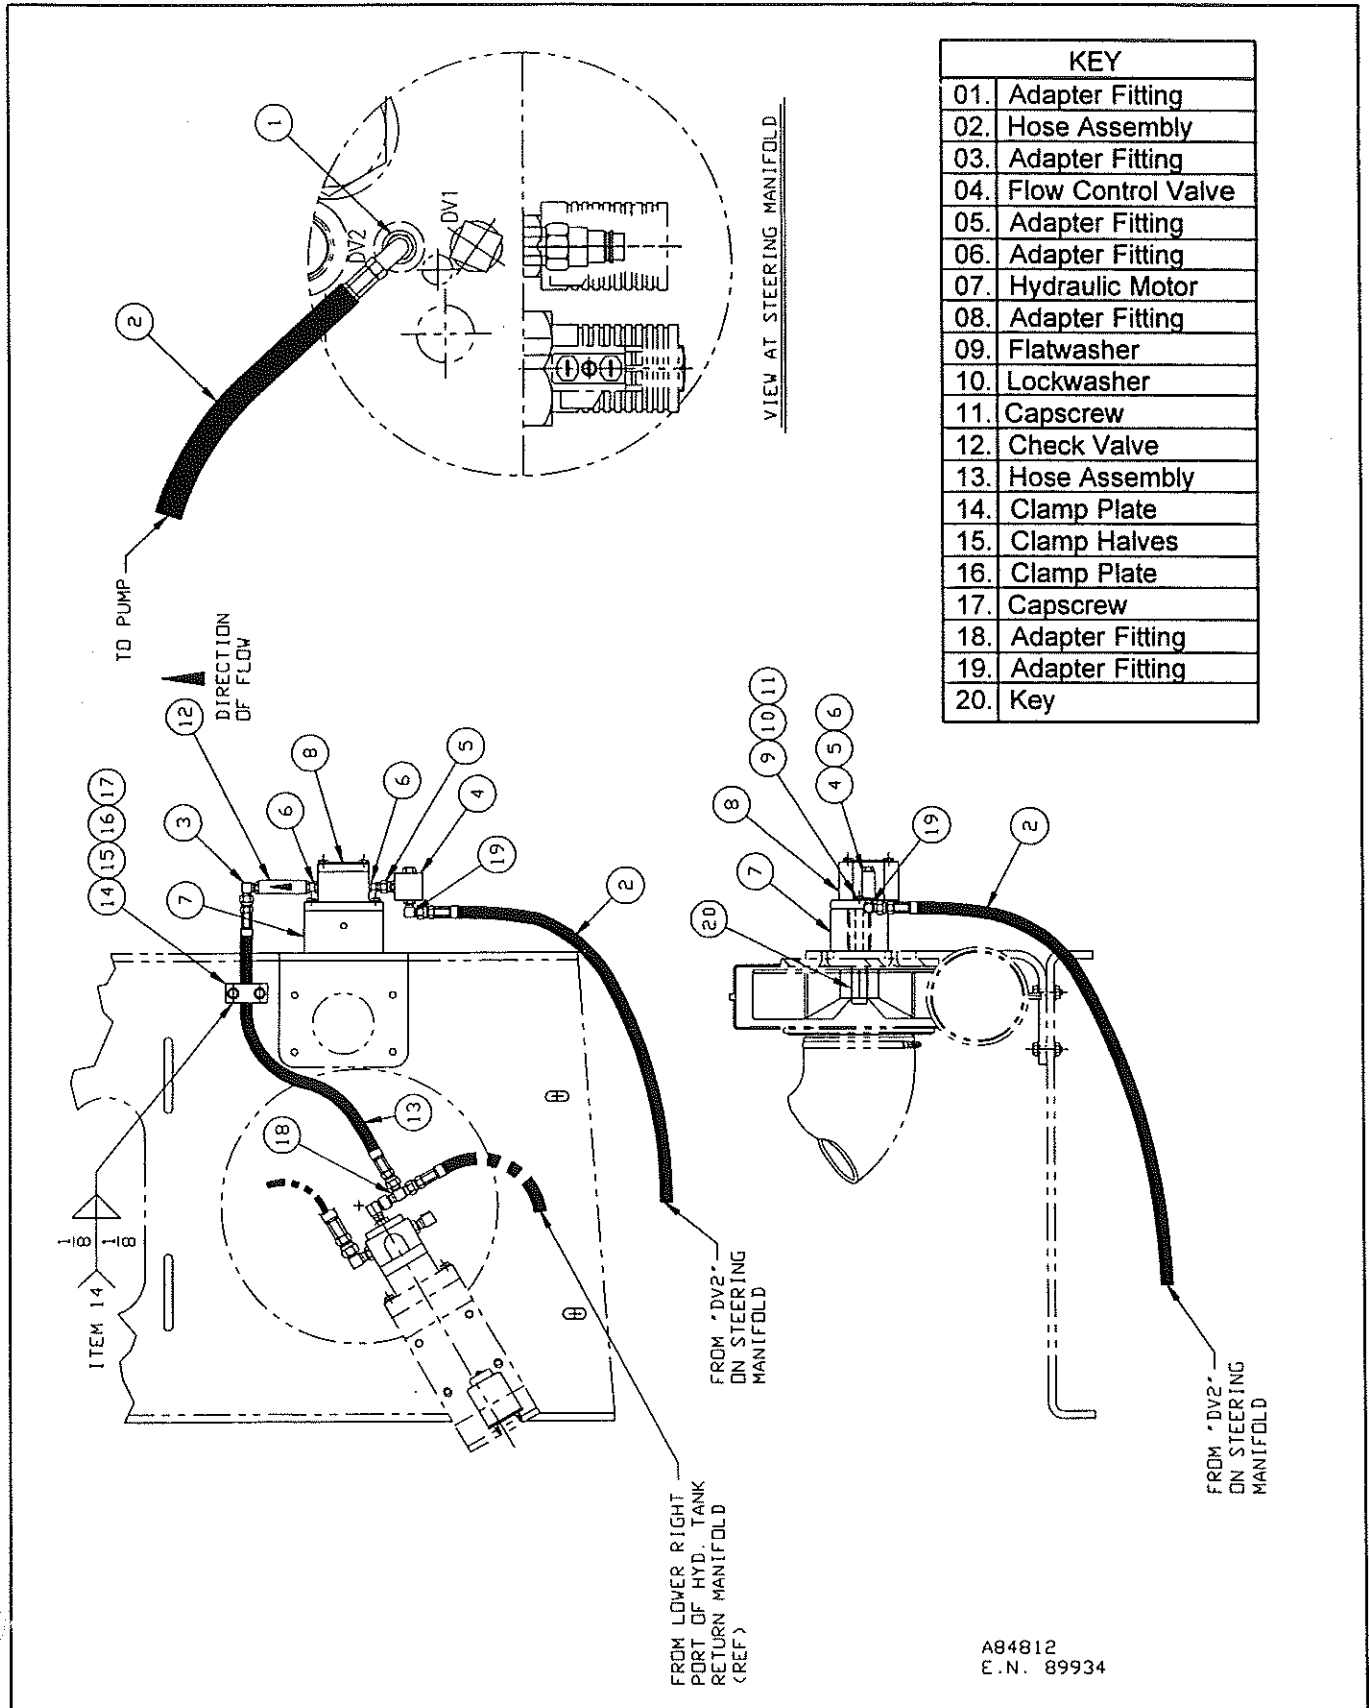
HYDRAULIC SCAVENGER BLOWER MOTOR SYSTEM
